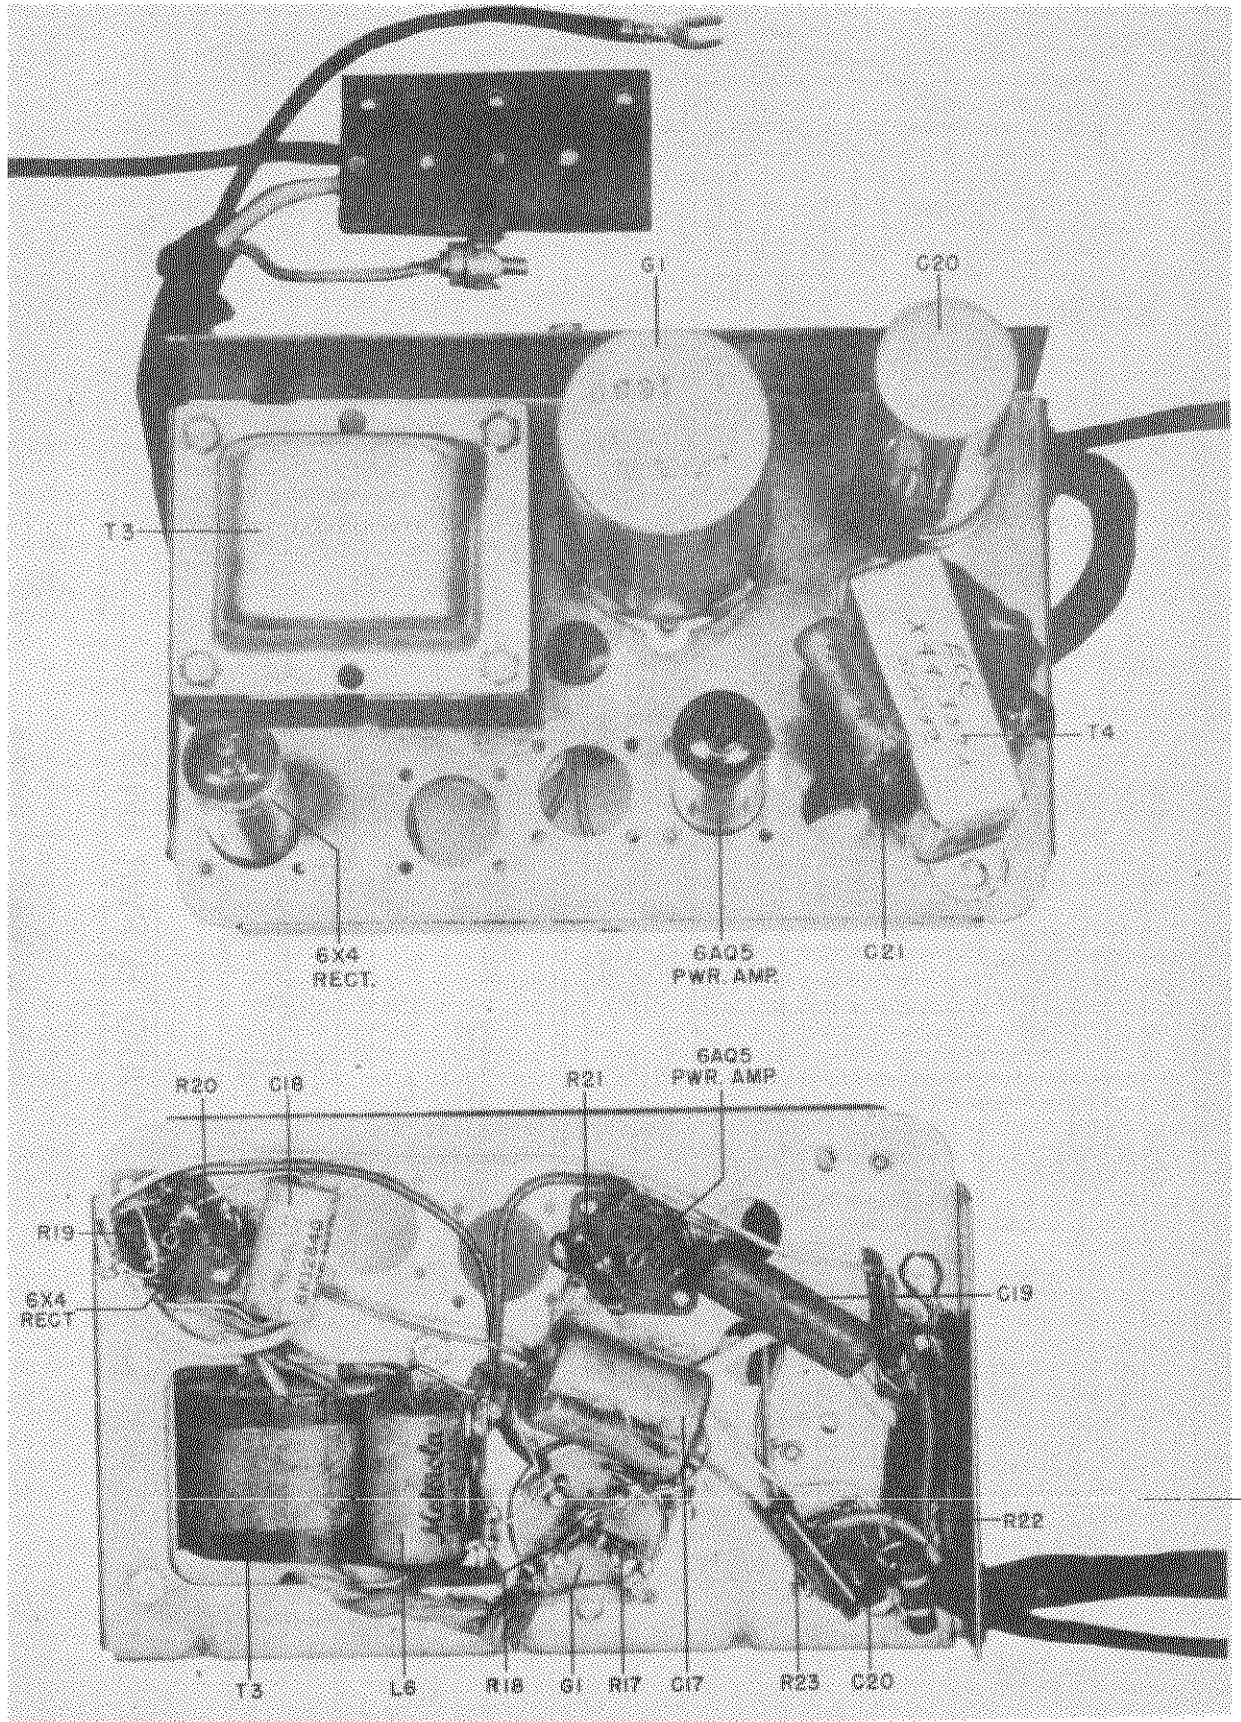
PARTS LOCATION - AUDIO & POWER UNIT
